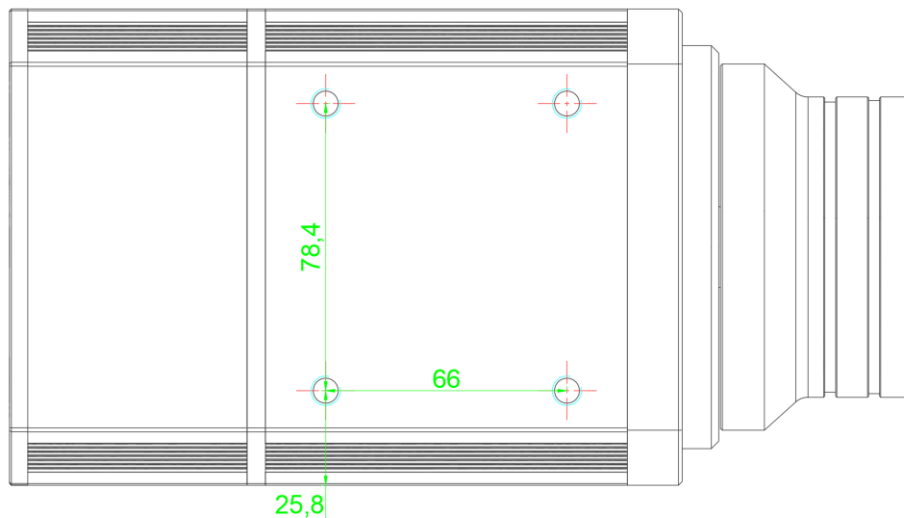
VNM Wheelbase Elite bottom mounting pattern.
